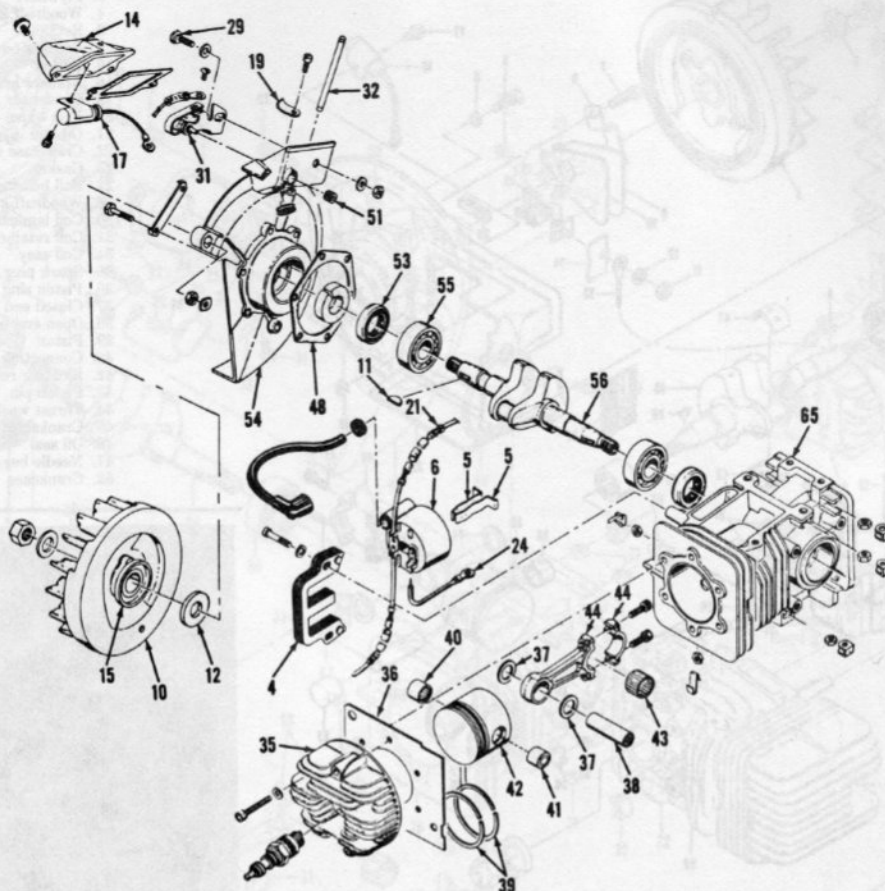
Exploded view of MC-10 engine. Note external breaker box on crankcase cover (54) and push rod (32) that actuates breaker points.
